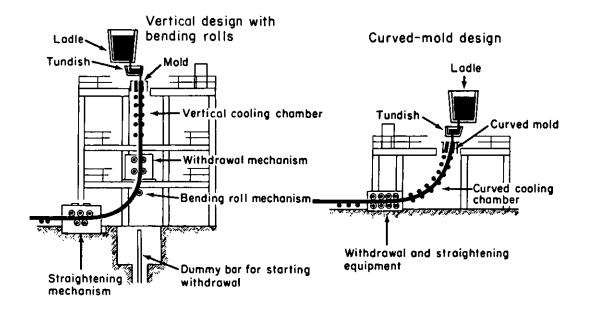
LATER DESIGNS OF CONTINUOUS-CASTING MACHINES FOR STEEL
